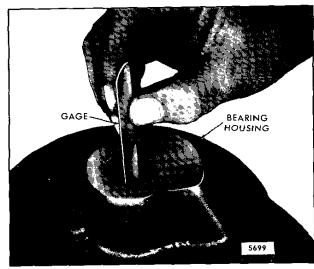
Checking Turbine Seal Ring Gap in Bearing Housing
